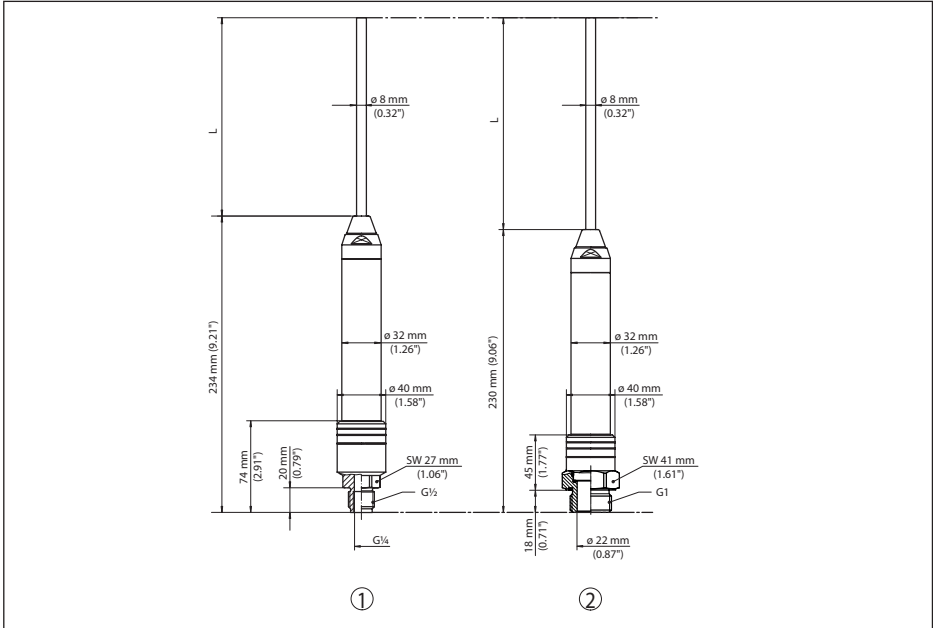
VEGAWELL 52, with threaded fitting and transmitter Duplex steel (1.4462)
